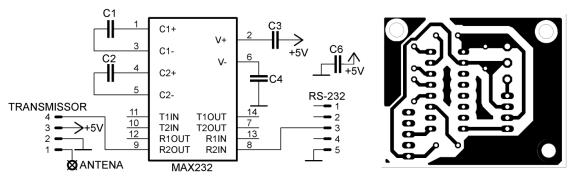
Manual Process for Manufacturing a Printed Circuit Board (PCB)
